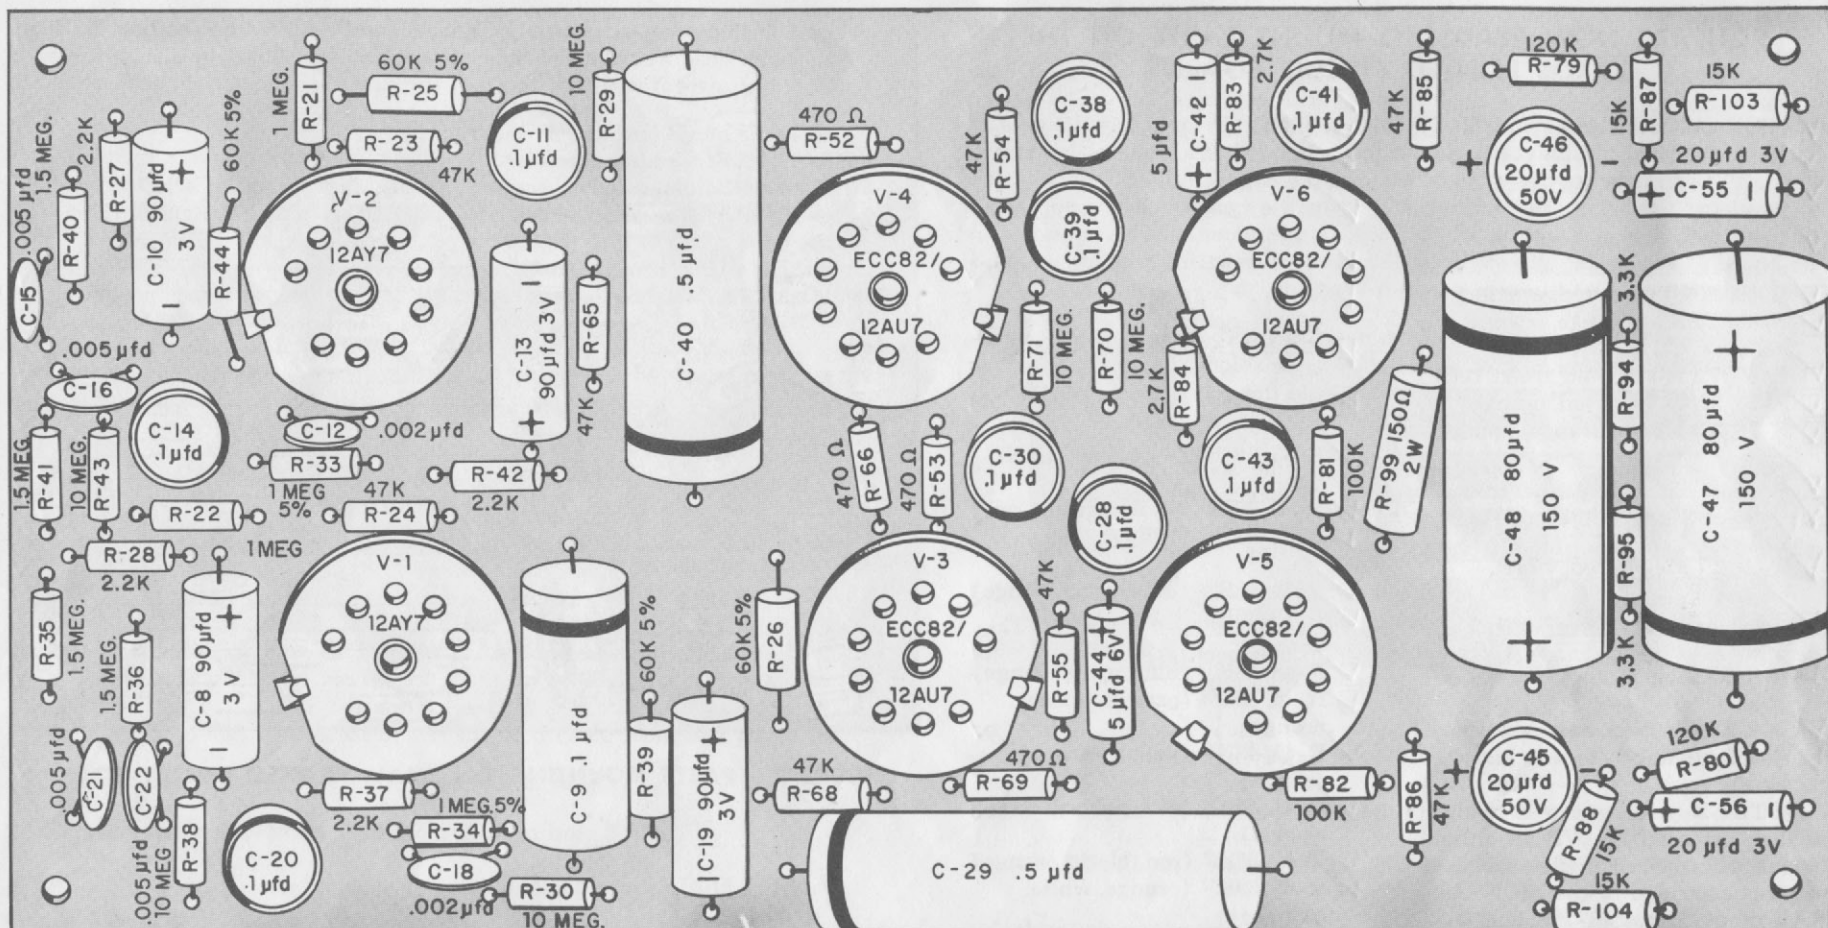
MOUNTING PARTS ON LARGE PRINTED CIRCUIT BOARD
